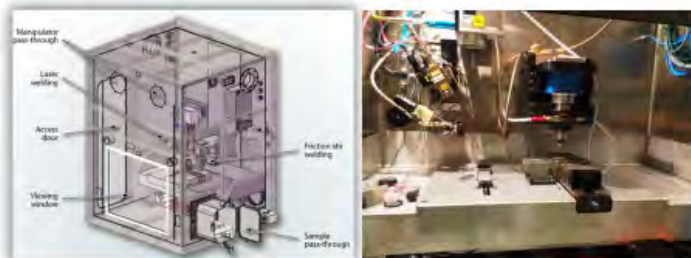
Schematic (left) and actual photo (right) of friction stir welding and laser welding setup in hot cell
